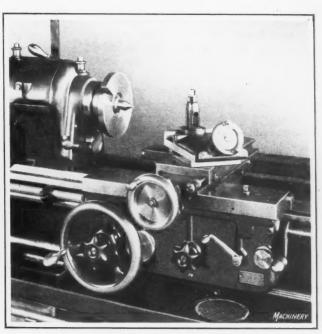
View of the Carriage showing the Quick-withdrawing Device and Other Construction Details
